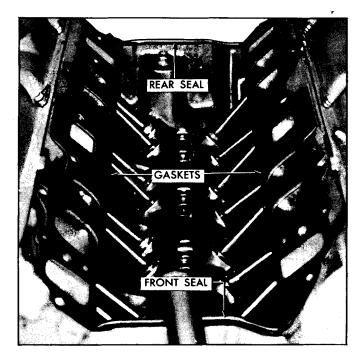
Intake Manifold Gasket Location - 307 Engine
